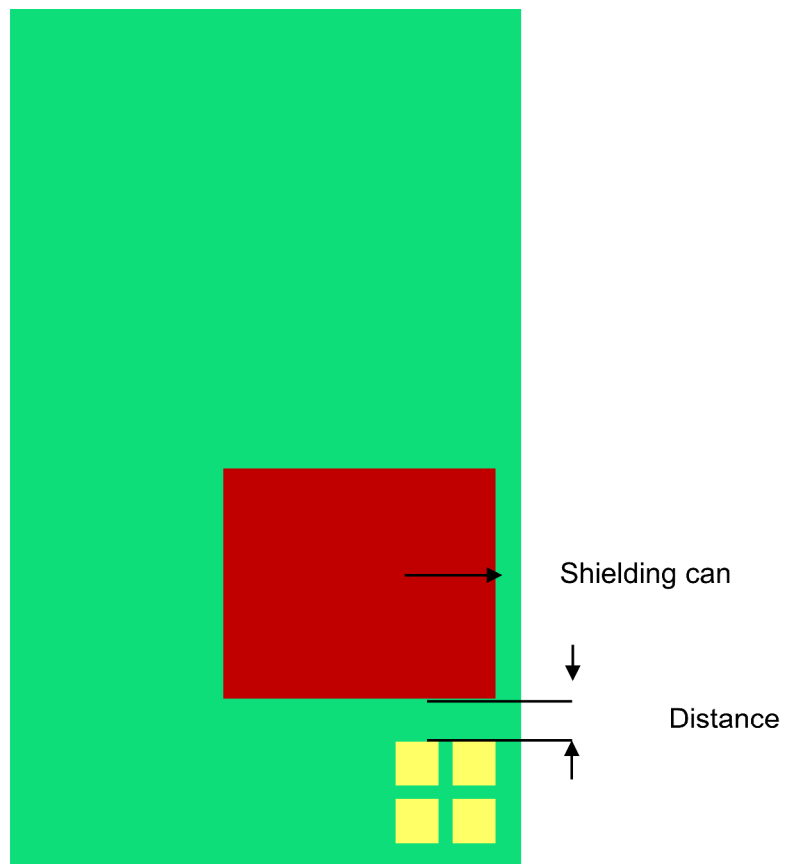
SHIELDING CAN FIXED ON REFERENCE PCB
